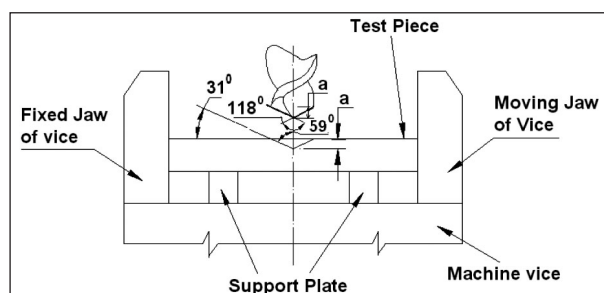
Making 31° exit edge bevel with a twist drill having 118° point angle.
